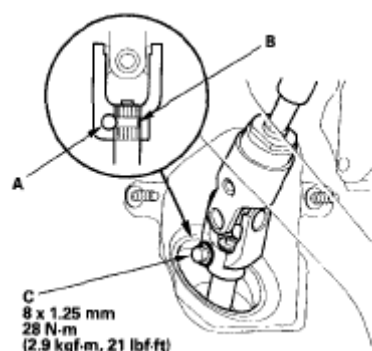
Identifying Bolt Hole, Steering Joint With Groove & Steering Joint Bolt With Torque Specifications
